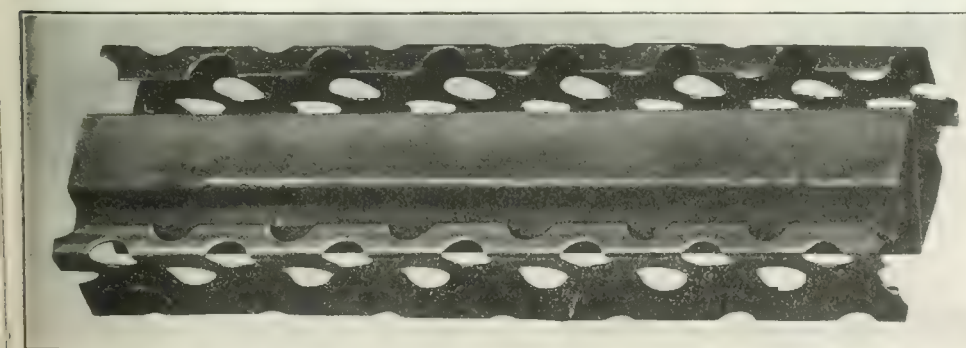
A Sample Piece of Studding Made by the Machine.
